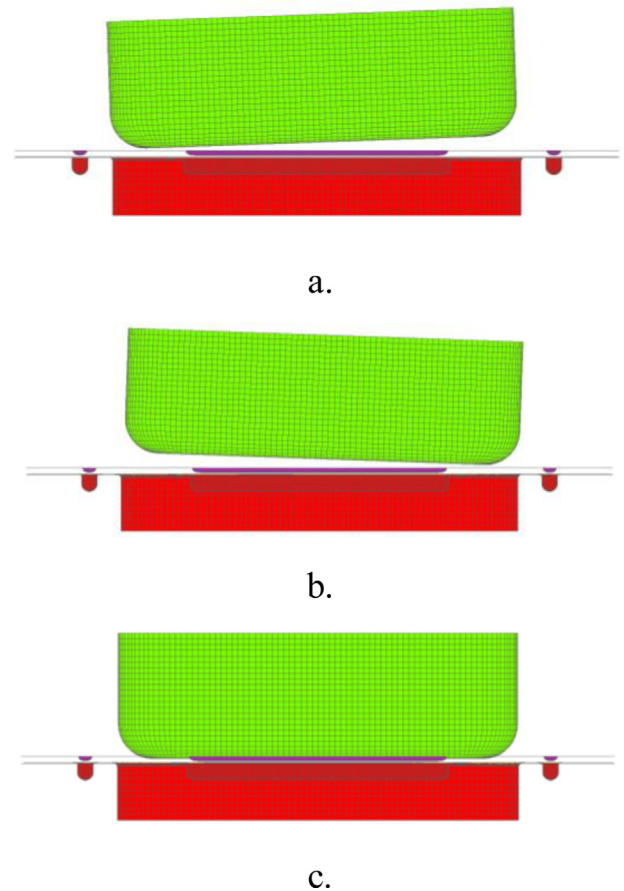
The numerical steps a), b), c) concerning new deep drawing forming kinematics with blank holder and draw beads.
